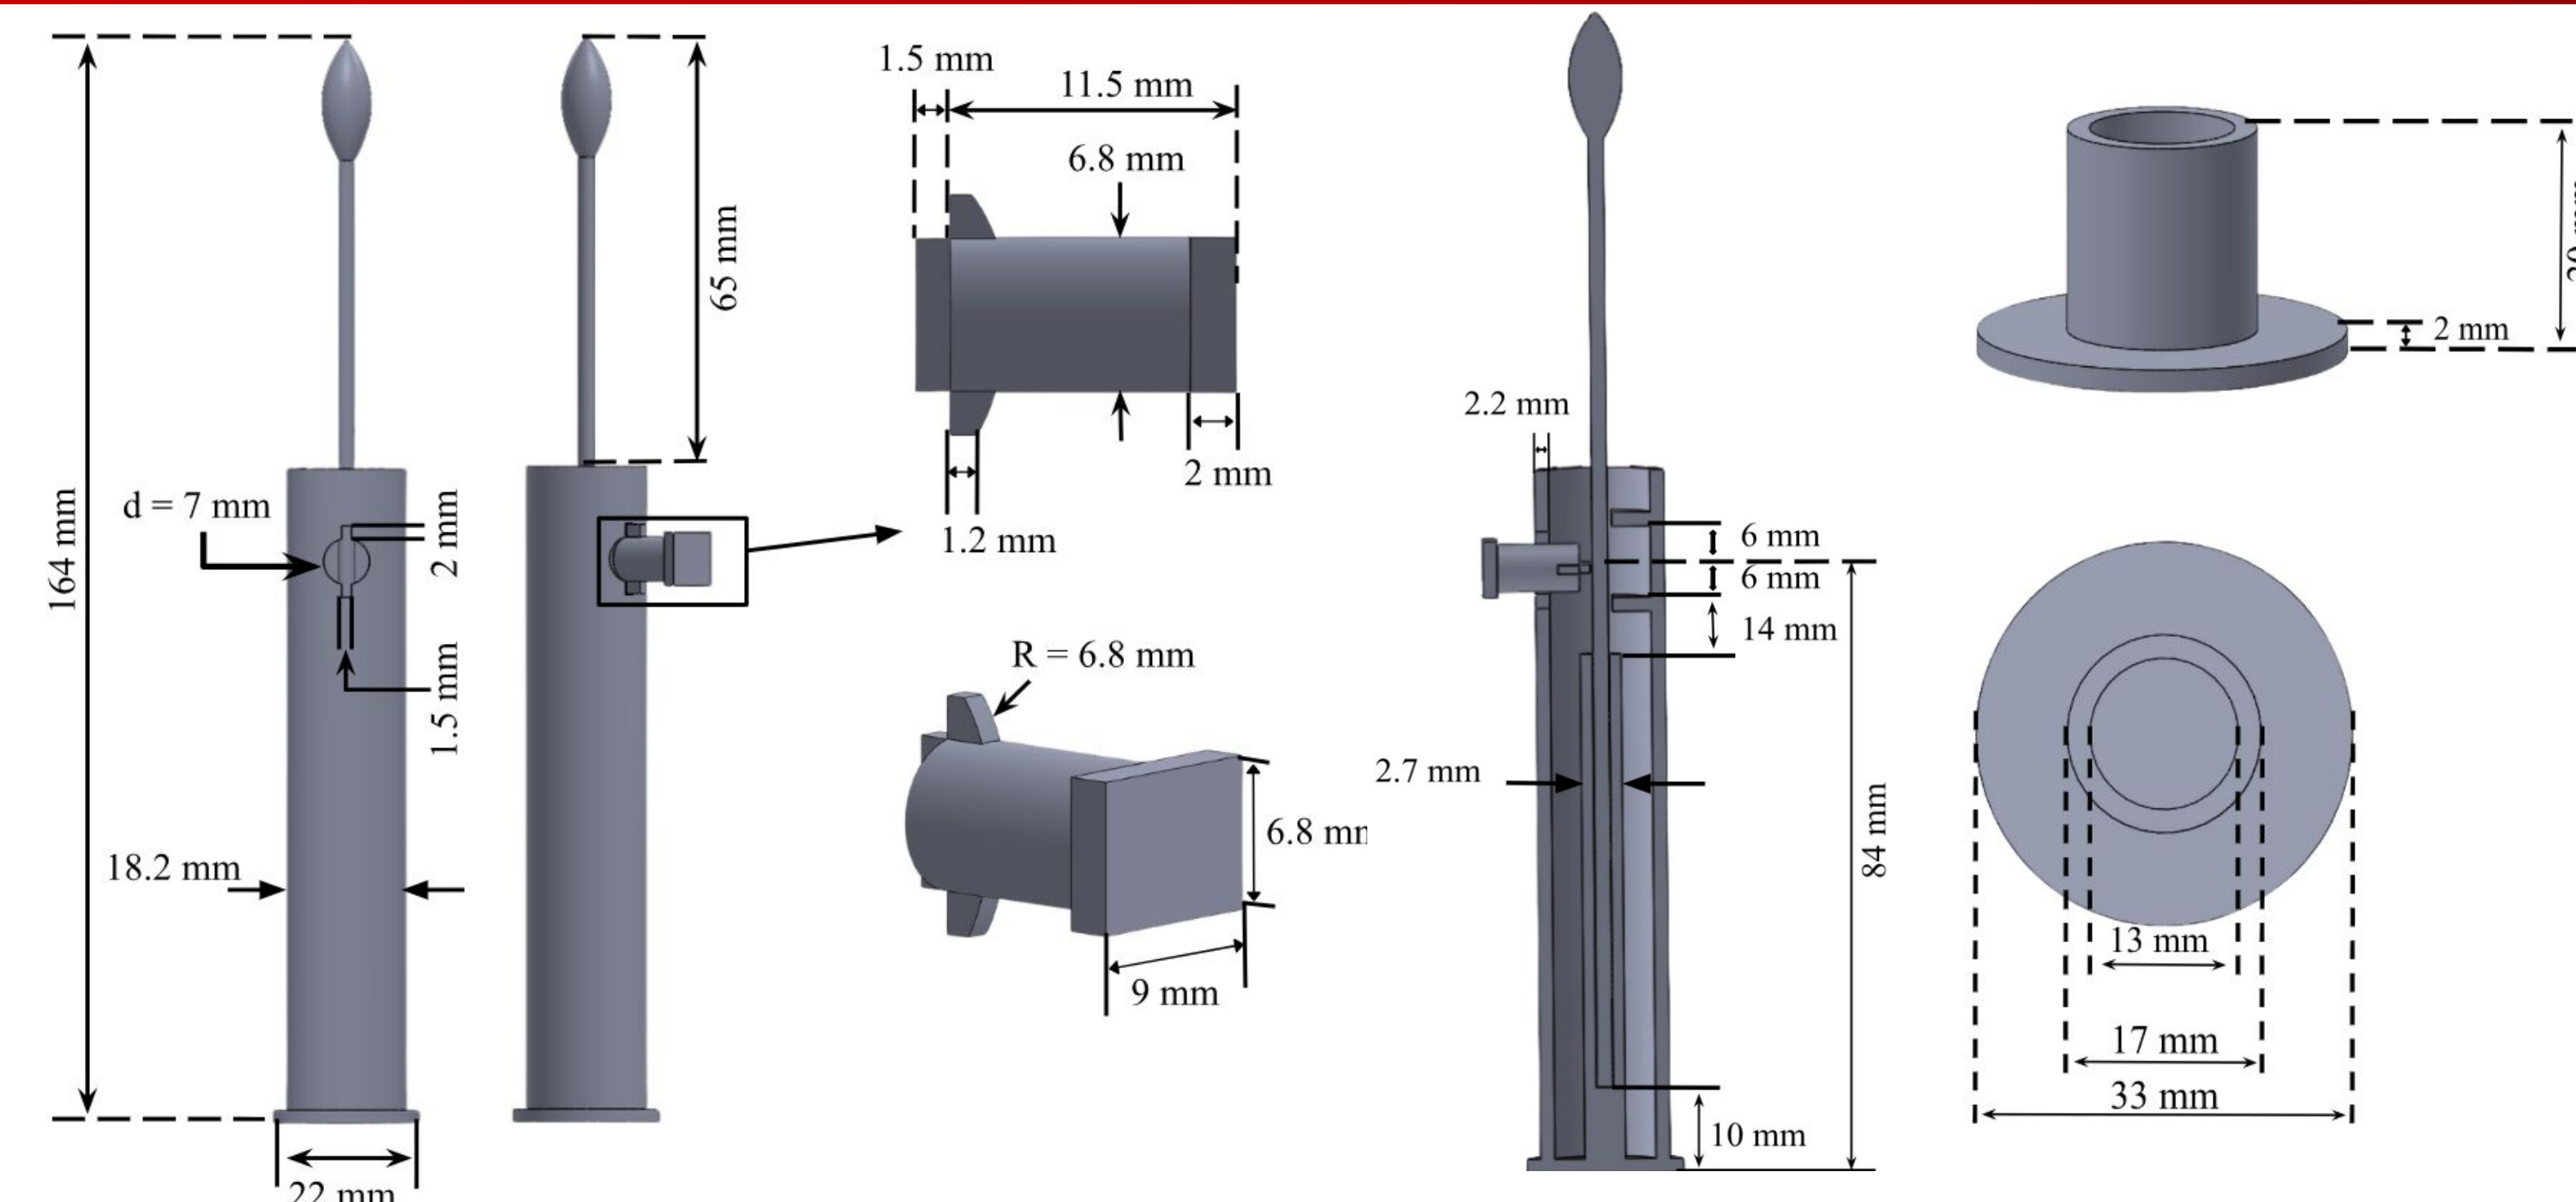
Dimensioned drawing of final design including the 3-point bend mechanism and the media tube stand.
